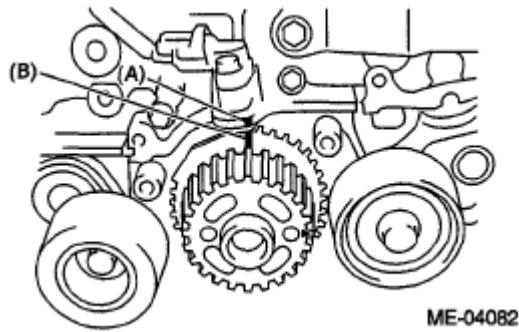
Identifying Single Line Mark (B) On Exhaust Cam Sprocket RH And Notch (A) On Timing Belt Cover
